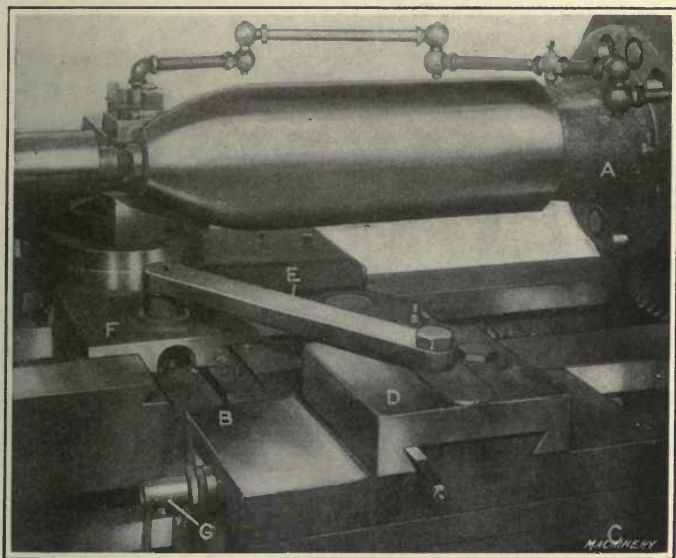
Turning Radius on Nose on a 24-Inch Engine Lathe
